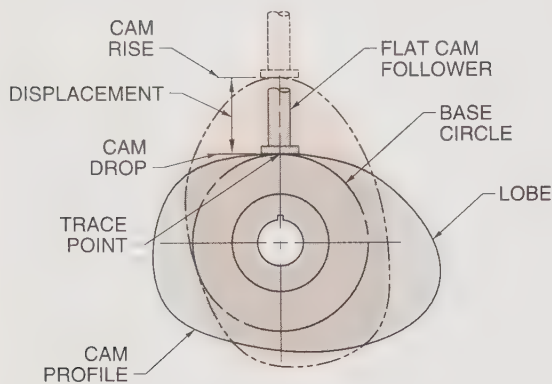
The cam profile shows the motion of the cam follower during machine operation.
